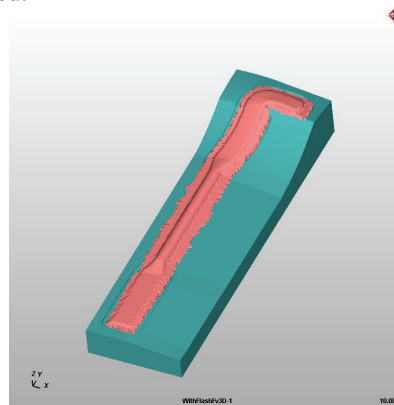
Lower tool for hot forging technology for orthopedic fixator
